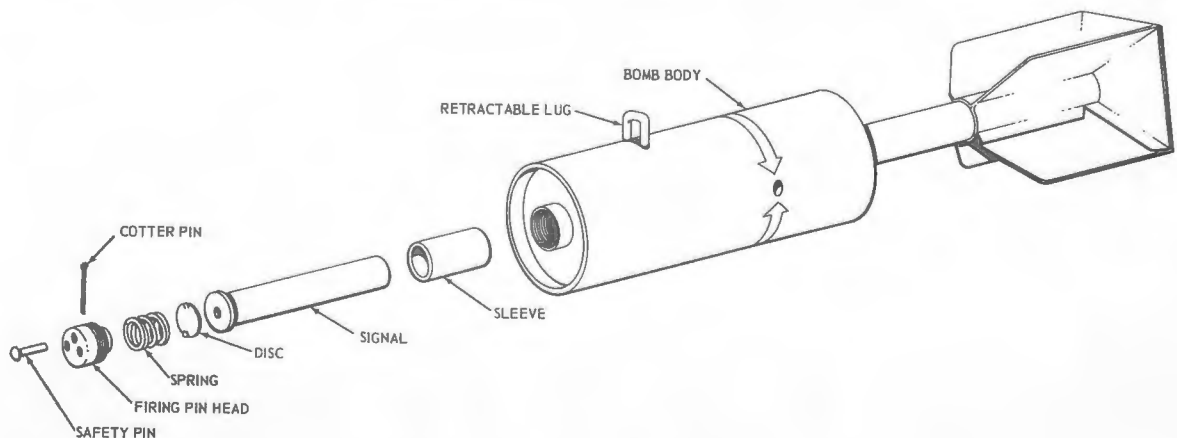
5-lb Practice Bomb Mk 106 Mod4, Exploded View.
